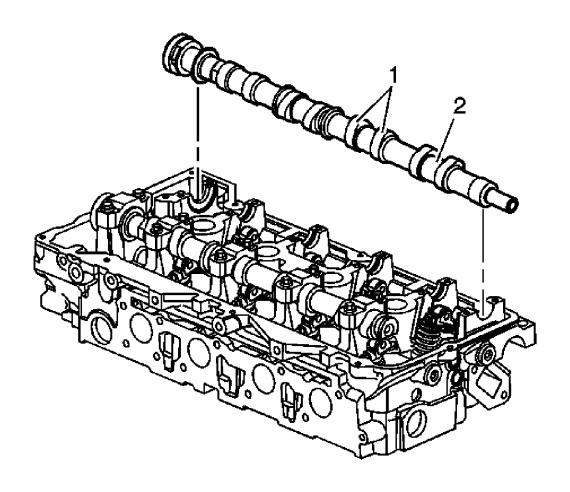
View of Camshaft Lobes & Journals Courtesy of GENERAL MOTORS CORP.
